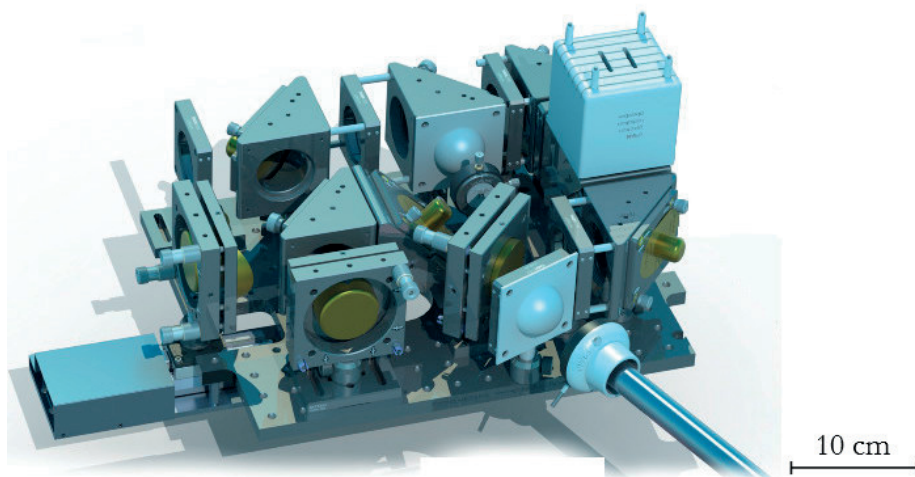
A CAD drawing of the assembled interferometer, taken from [15]
